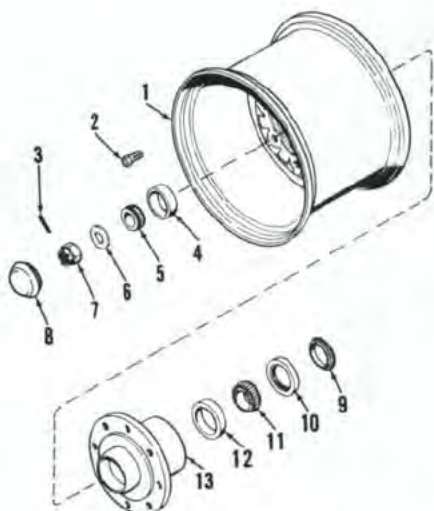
Exploded view of wheel hub and bearing assembly used on all models.
